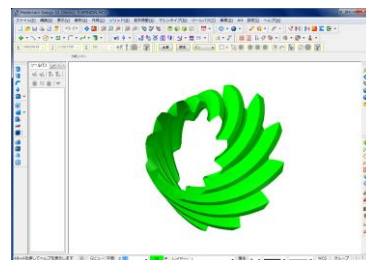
CAD- drawing example (Pinion-3D-IGES)
